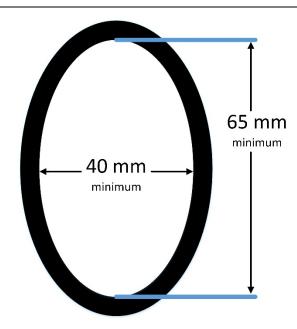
Headset Ear Shell Cushion Minimum Inner Dimensions
